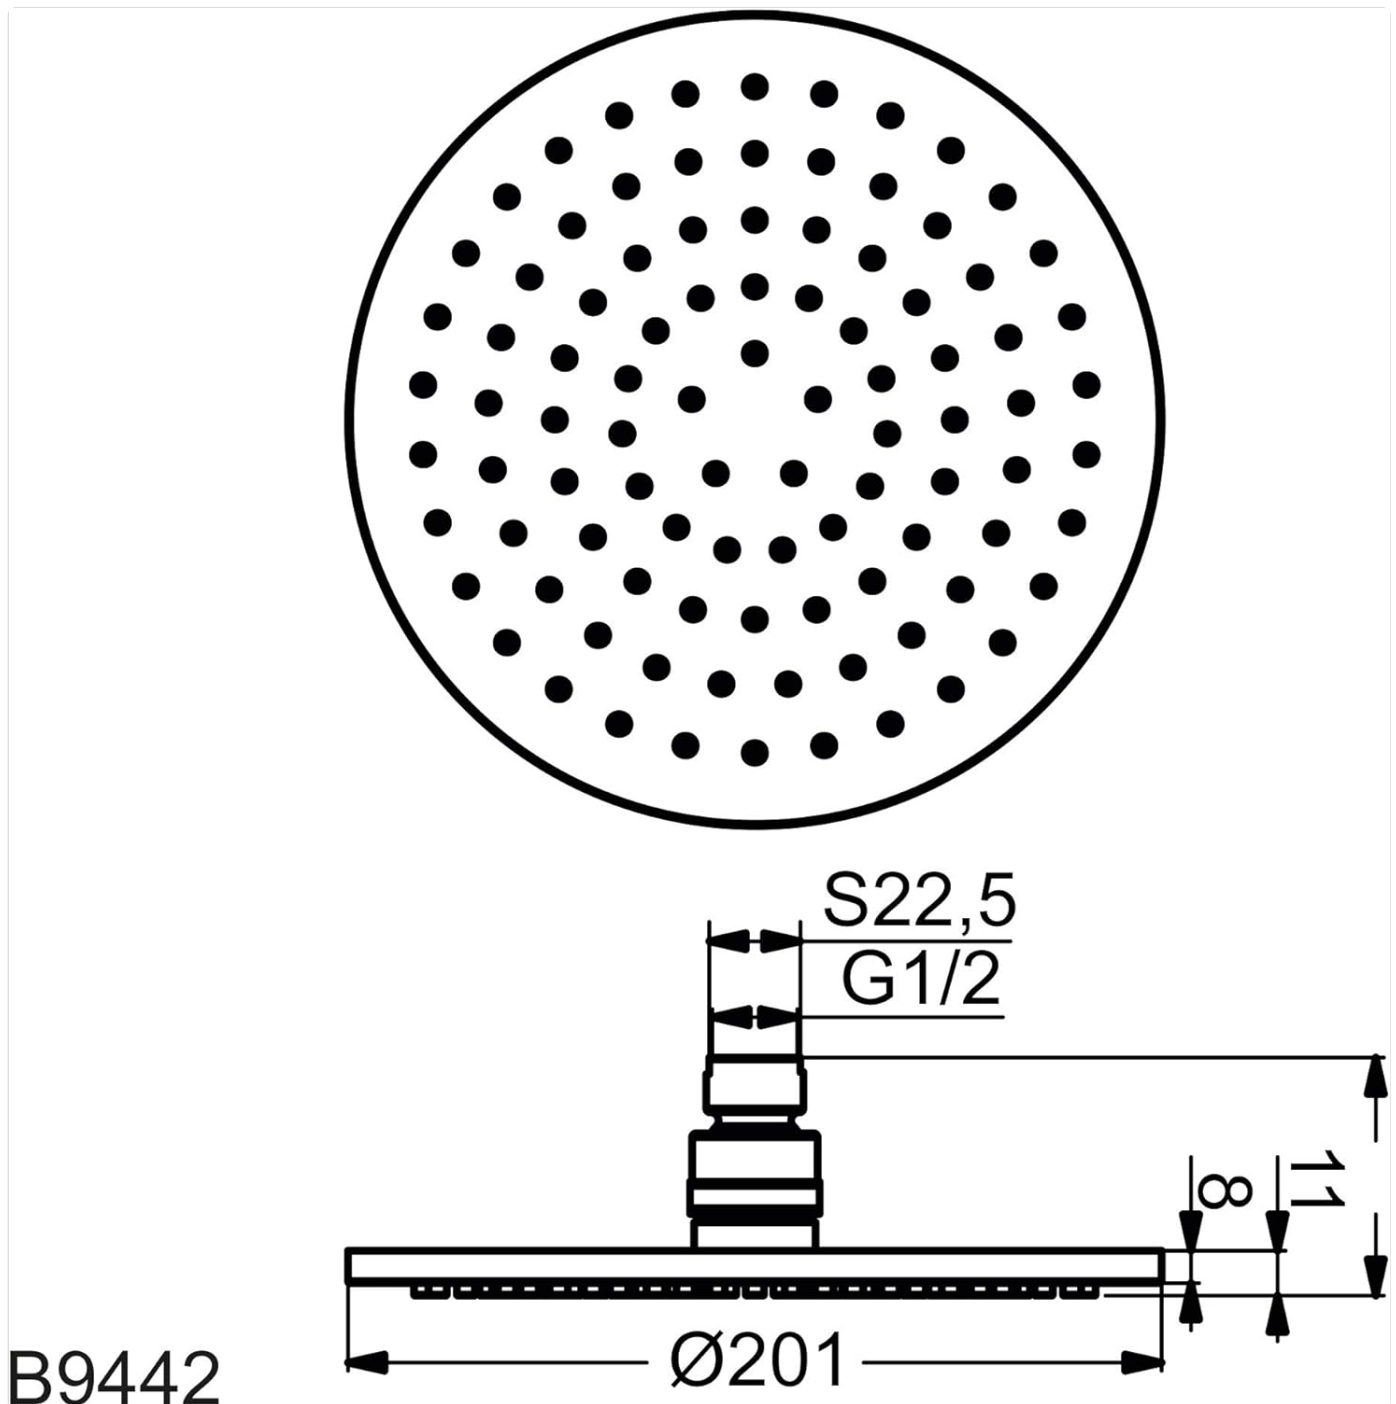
Technical drawing showing the dimensions and G1/2 connection thread of the shower head.
